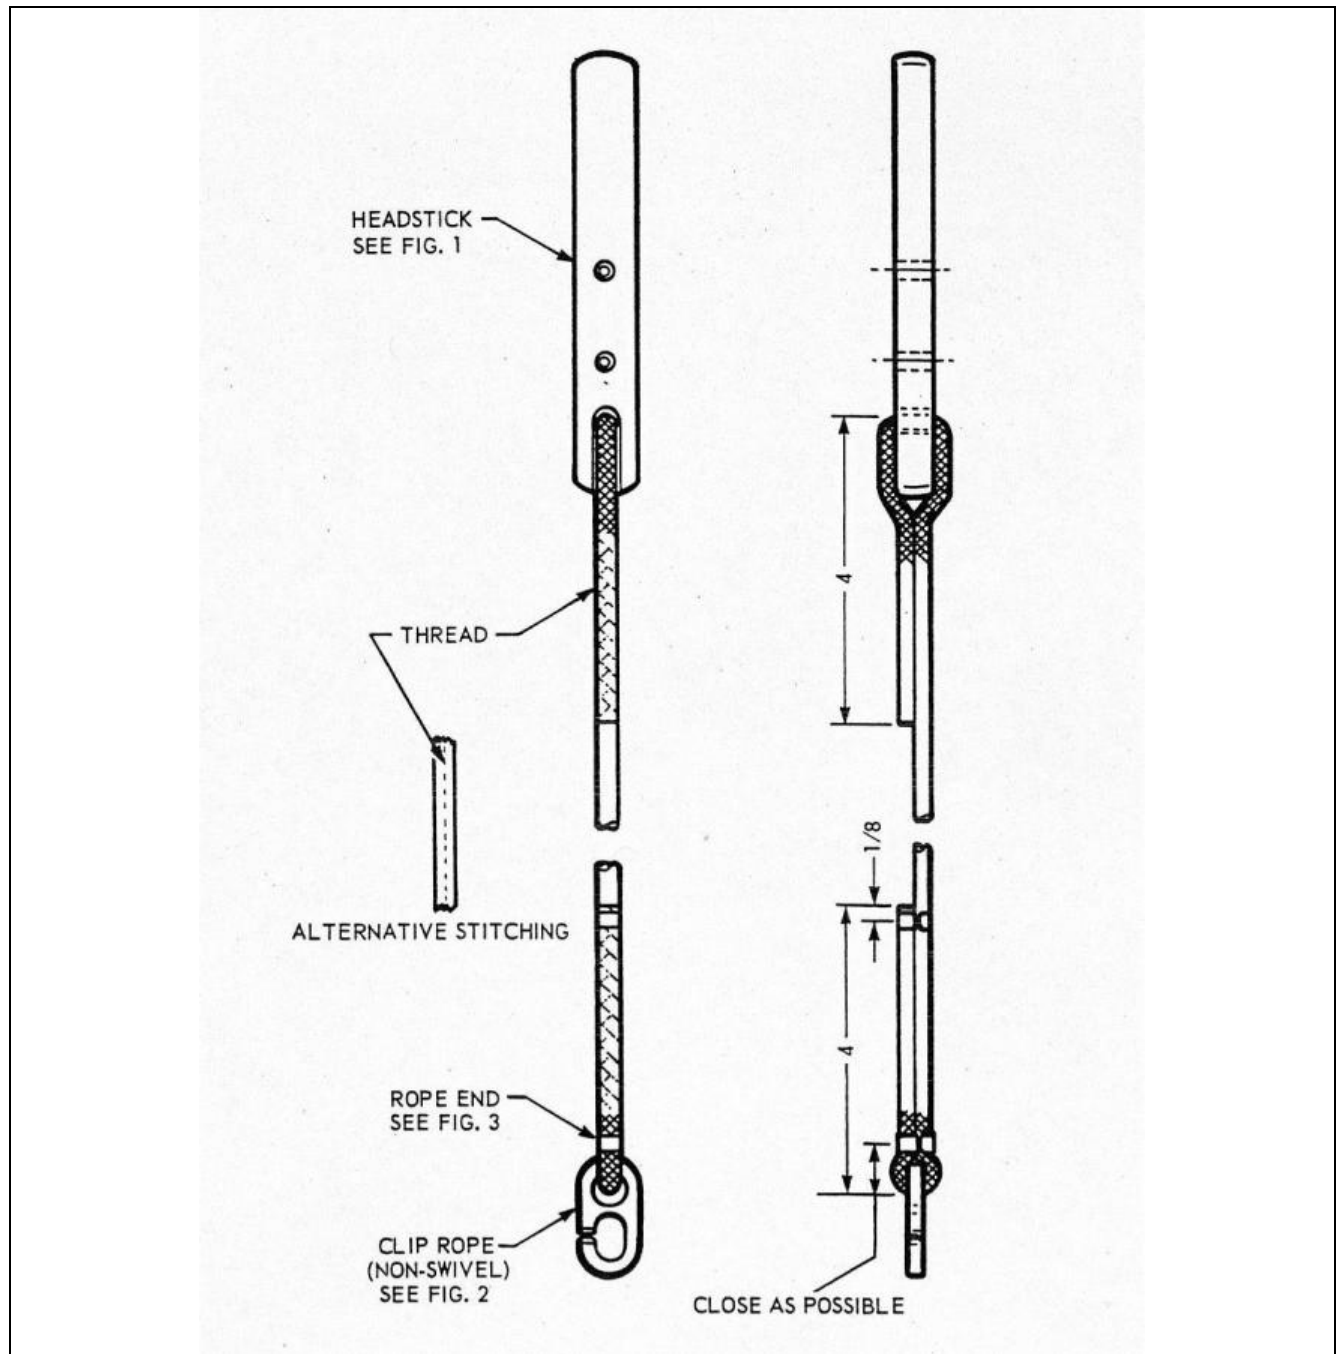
Headstick Assembly / Figure 11. Assemblage de la tête de la hampe
